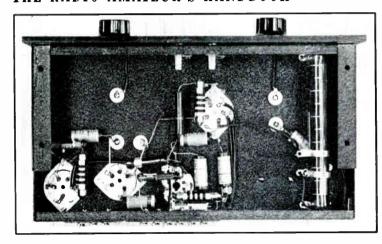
BOTTOM V1EW — 6L6-807 TRANS-MITTER
